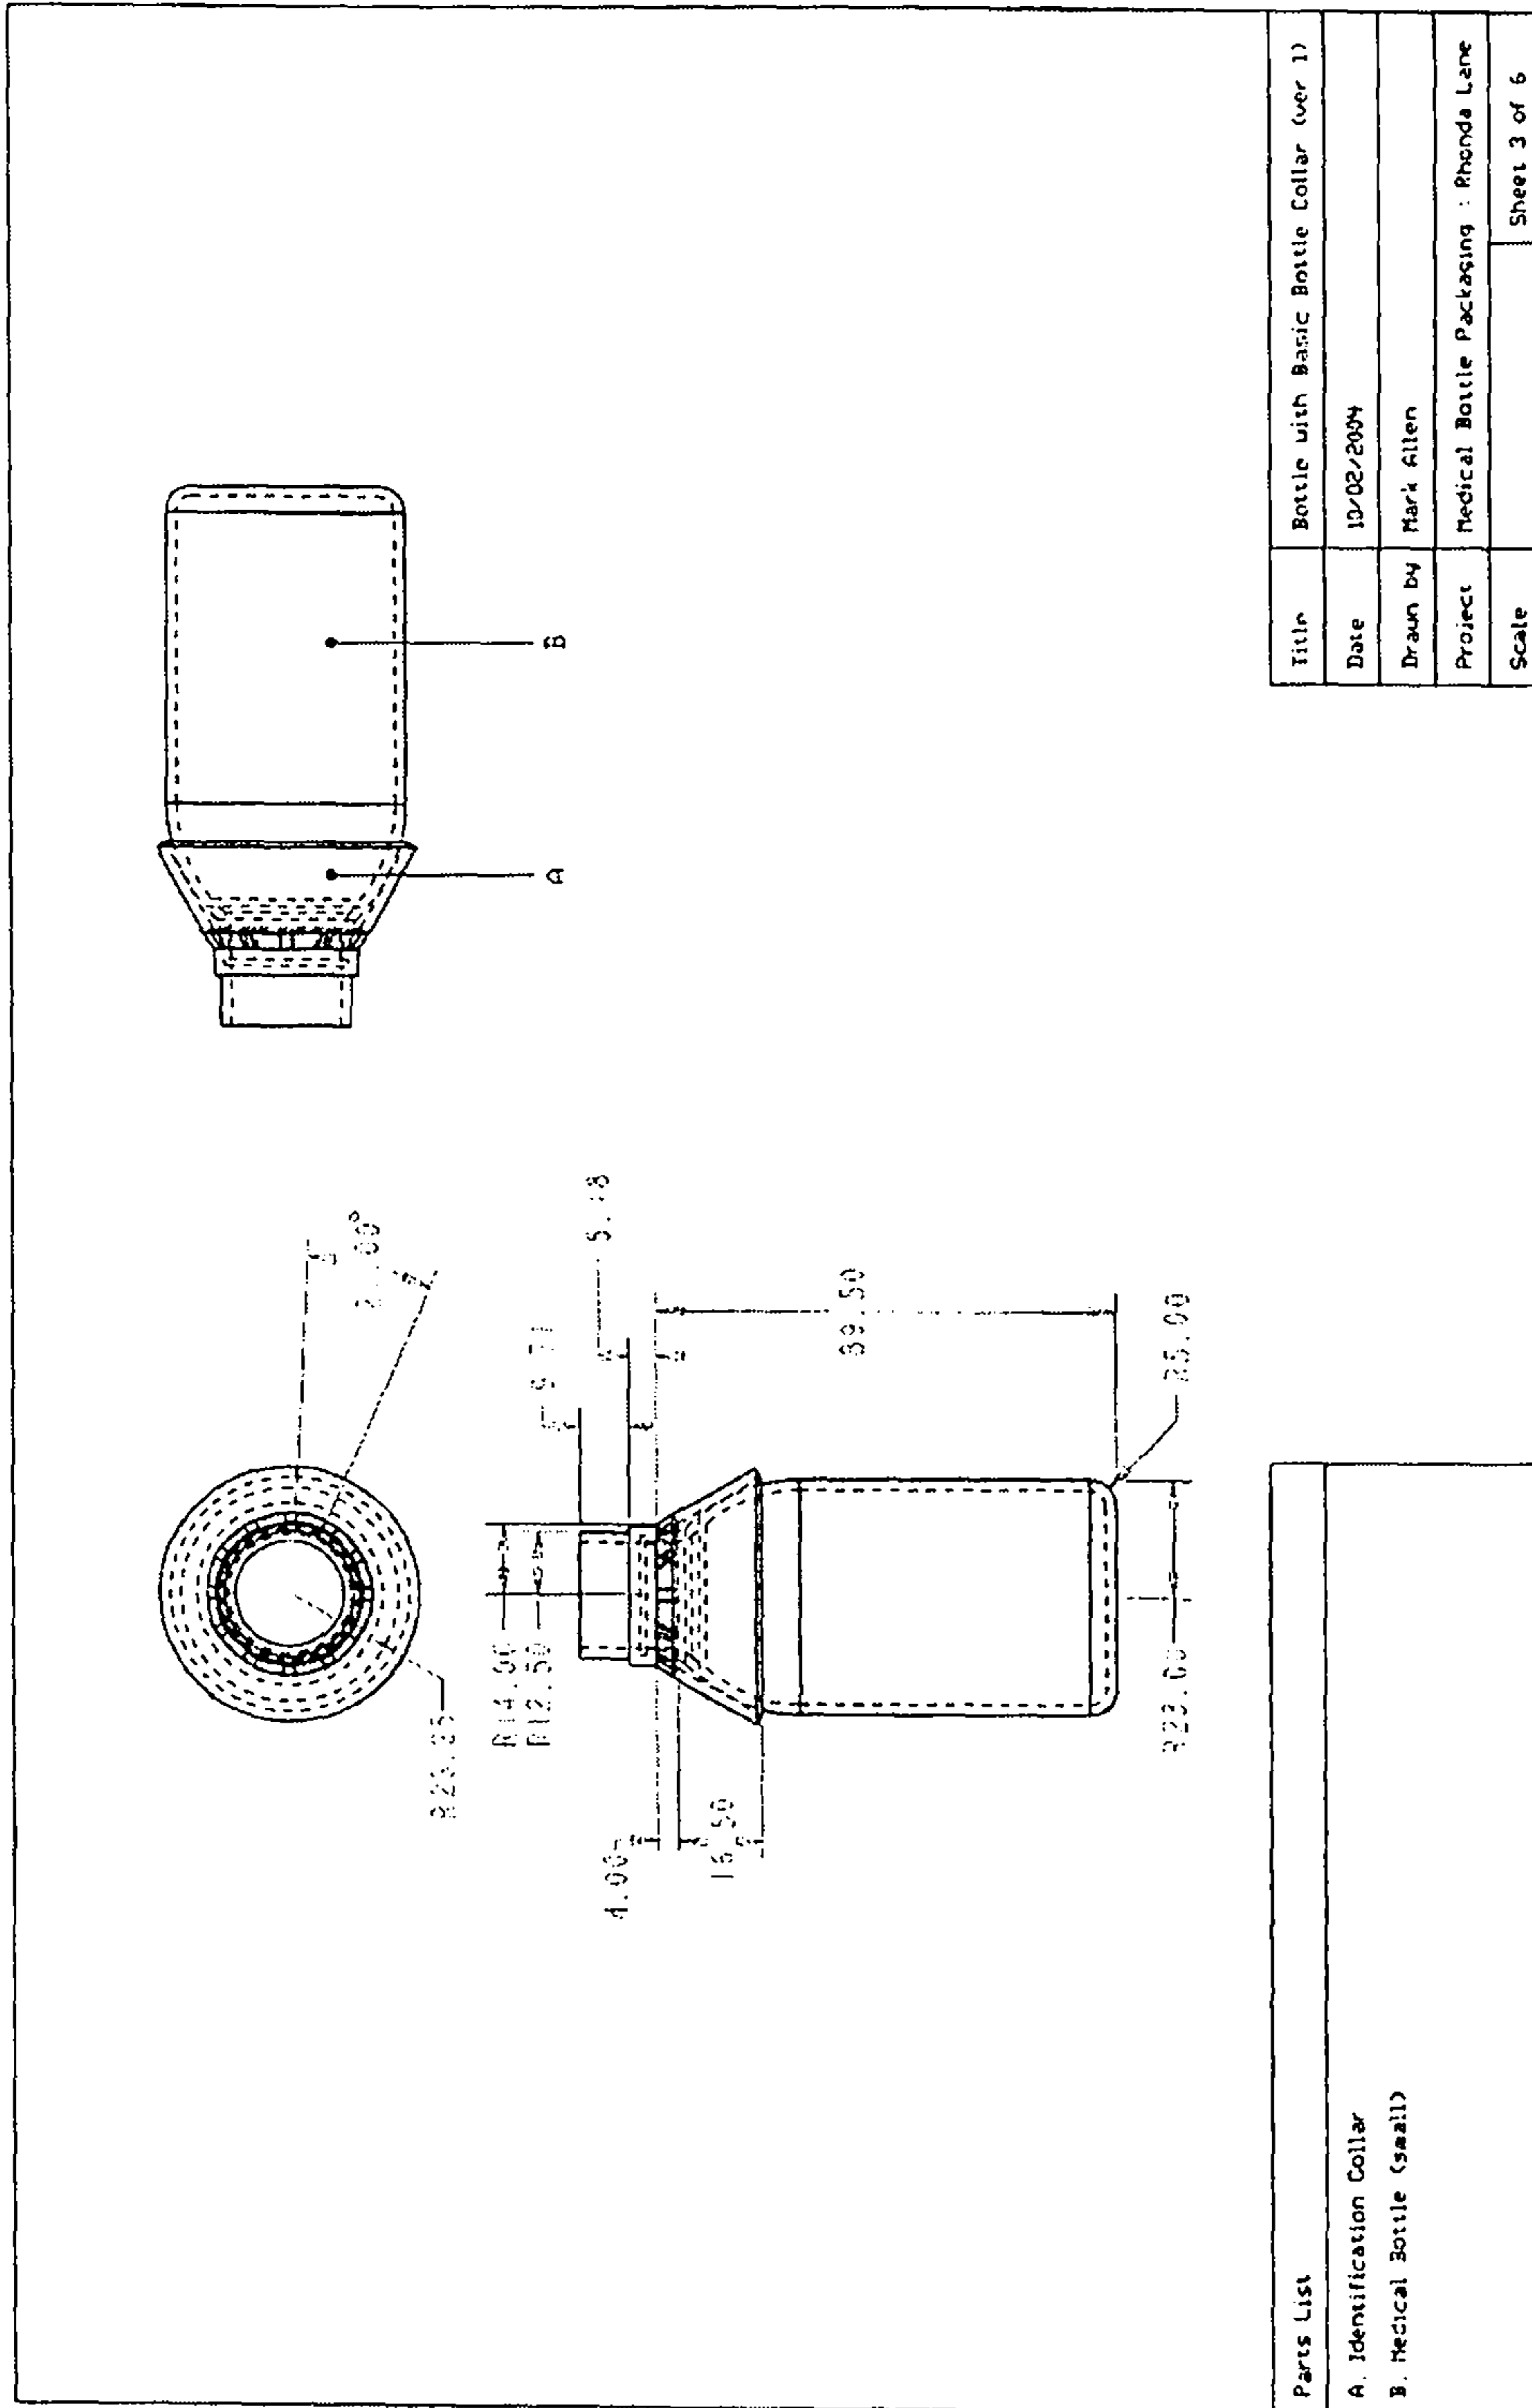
Pro- Engineer drawing of the basic drug identification collar
